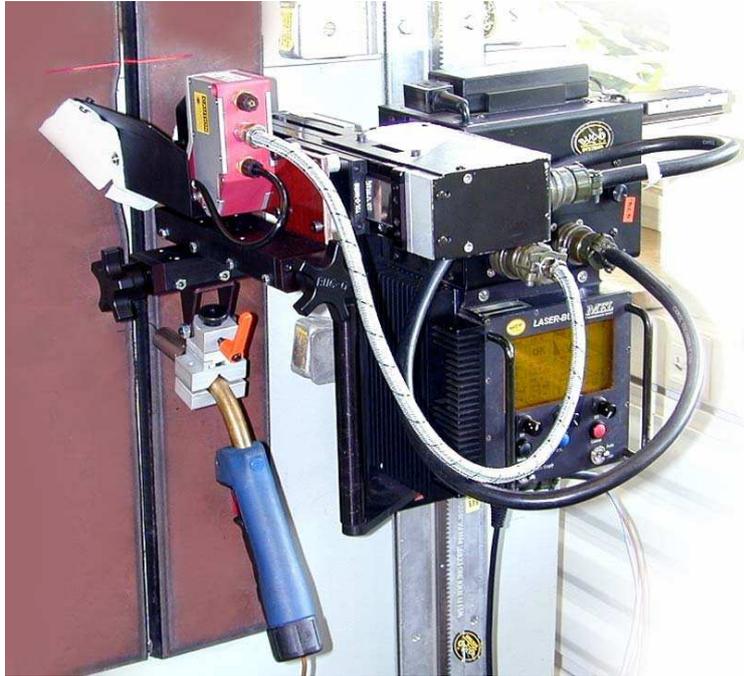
Laser guided welding carriage (Bug-O-Systems, MEL Mikroelektronik GmbH)
